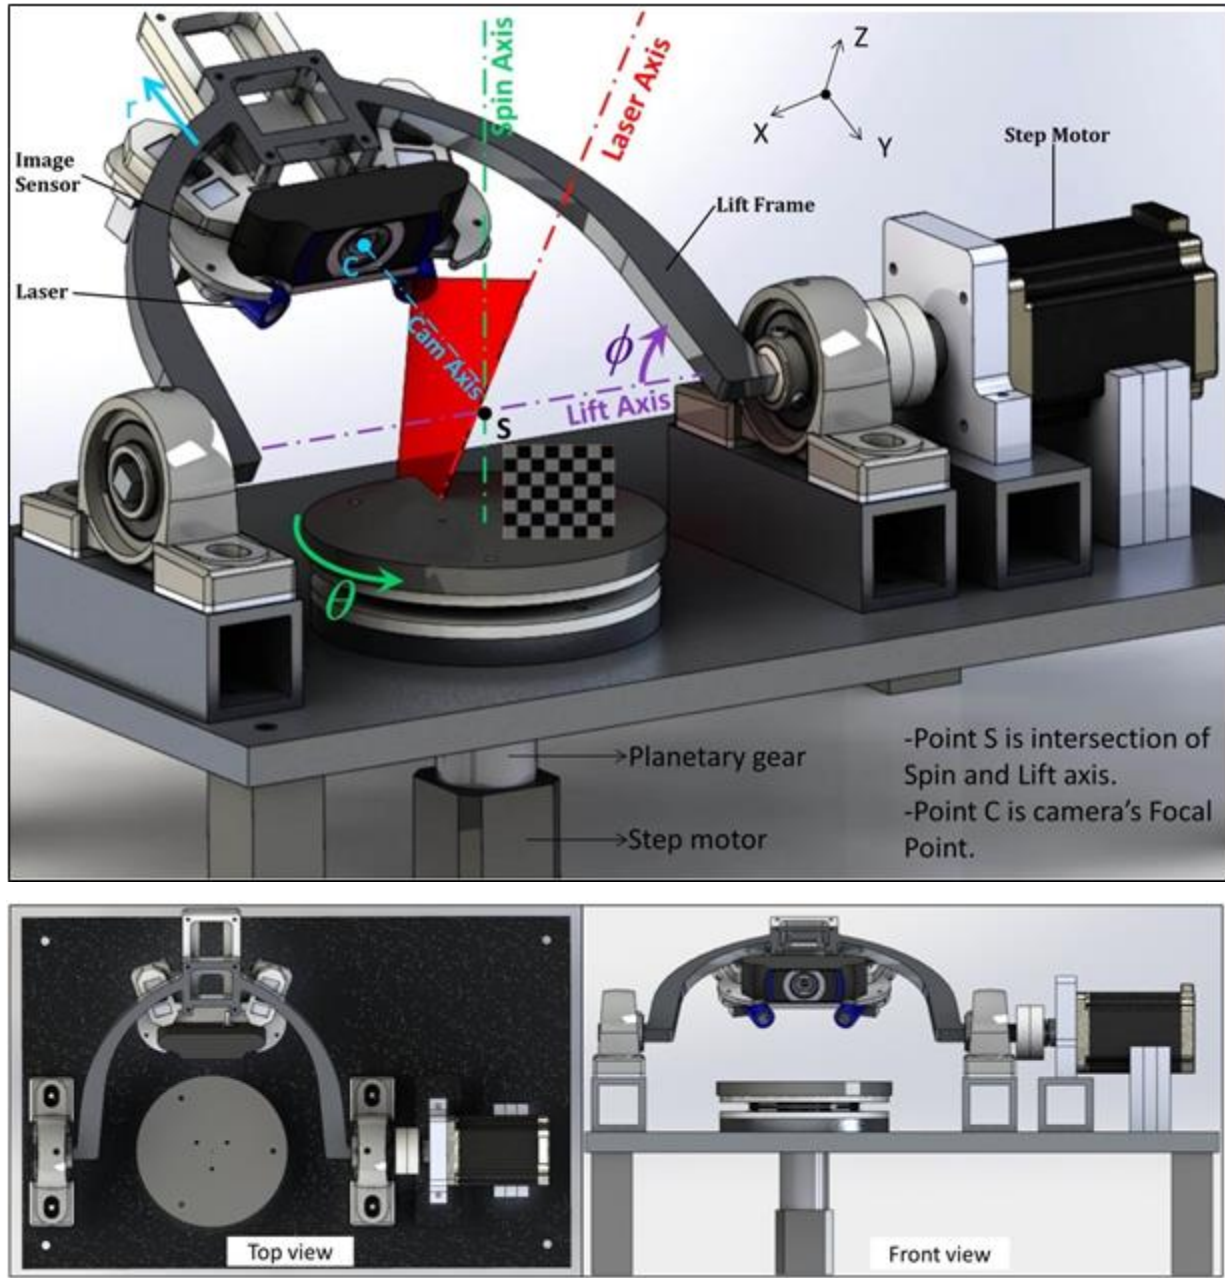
Scanner setup showing relevant geometric axes, calibration grid and other design features with front and top views
